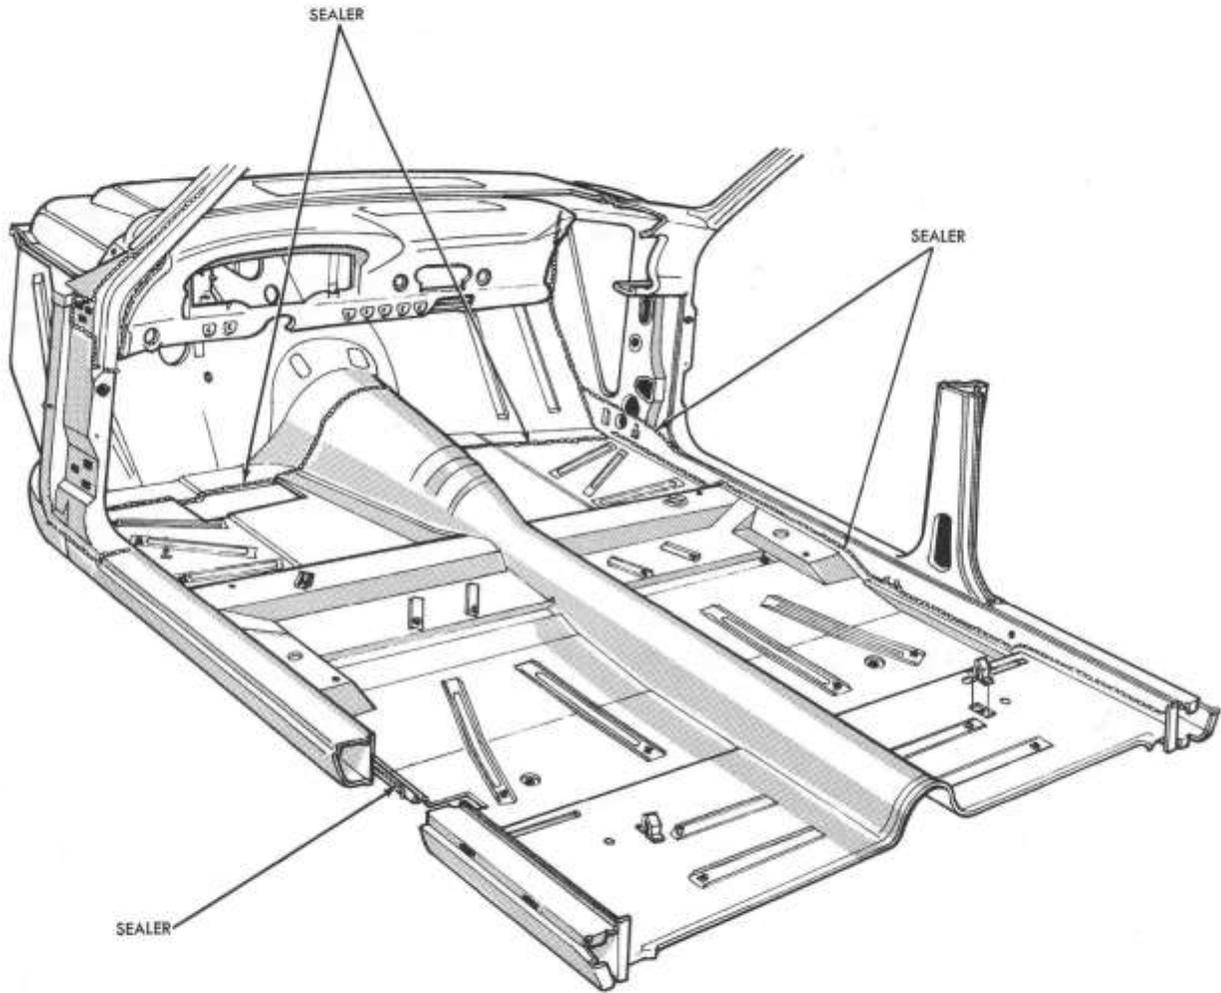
Front Floor Pan, Cowl Side, and Instrument Panel
